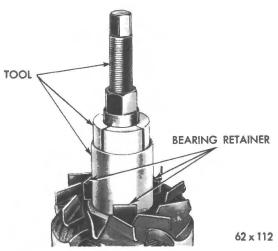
Removing bearing from rotor shaft (Tool CA-3615 and adapters CA-3615/2).
